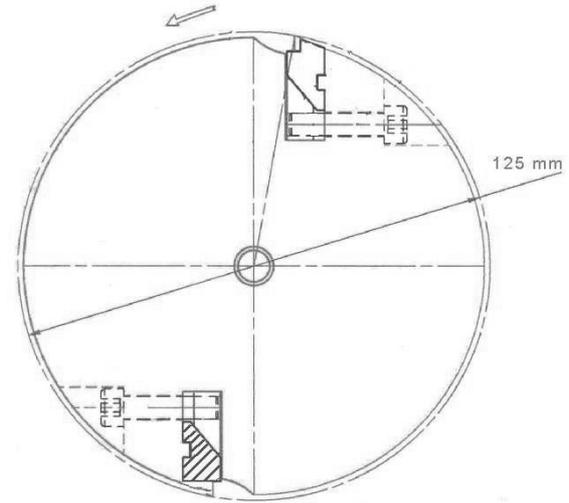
Single tooth tool-holder. The removed tooth has been replaced by an equal weight steel piece (hatched area)
